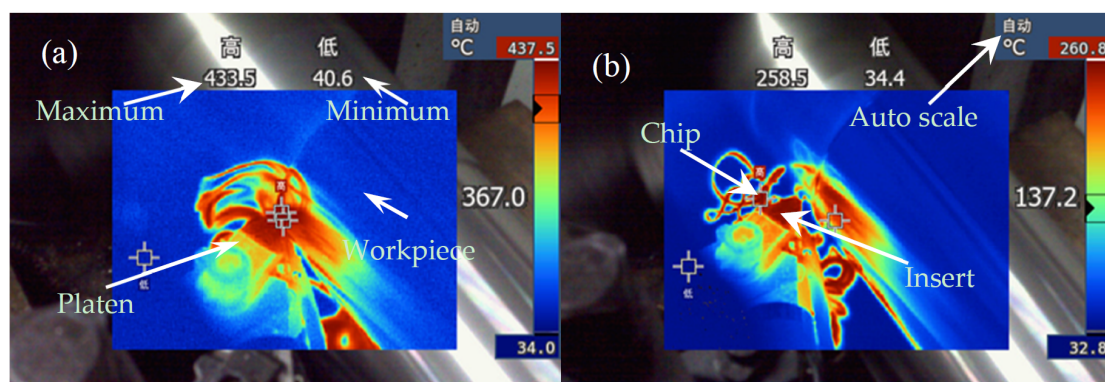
Captured infrared image of the tool–chip interface. (a) Steady machining state; (b) cutter–shaft backstroking process.
